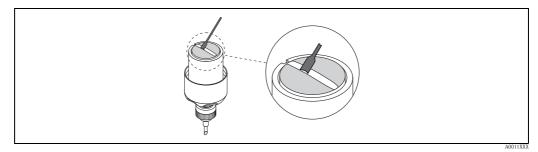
Coating the contact surfaces of the sensor with coupling fluid
